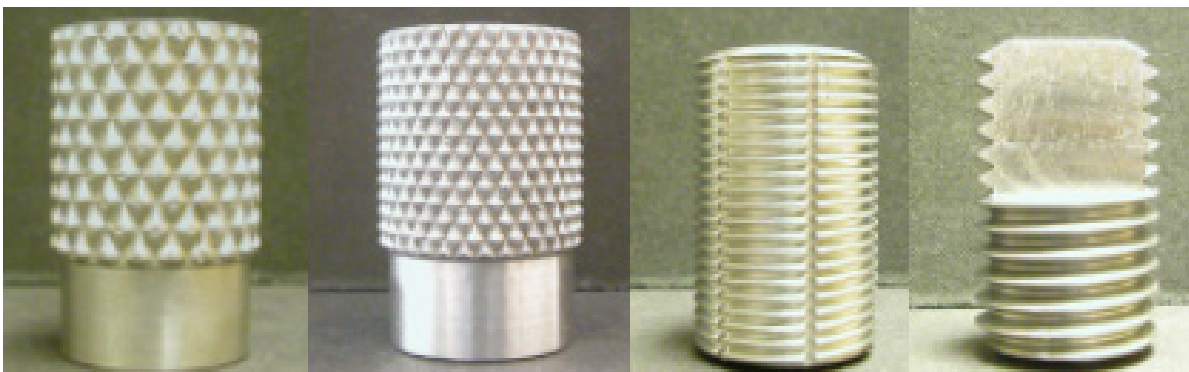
Example of some of the mandrel surfaces. Left to right: coarse knurl, fine knurl, fine screw thread with axial grooves, and coarse screw thread
